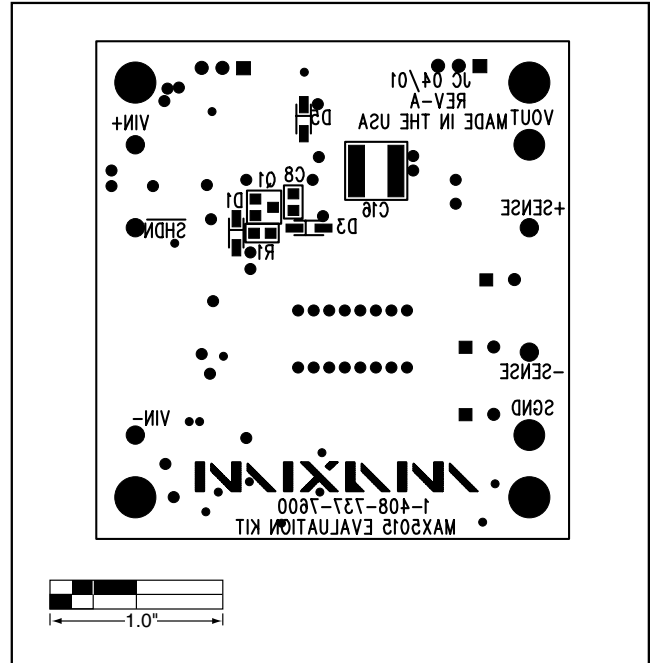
MAX5015 EV Kit Component Placement Guide—Solder Side
